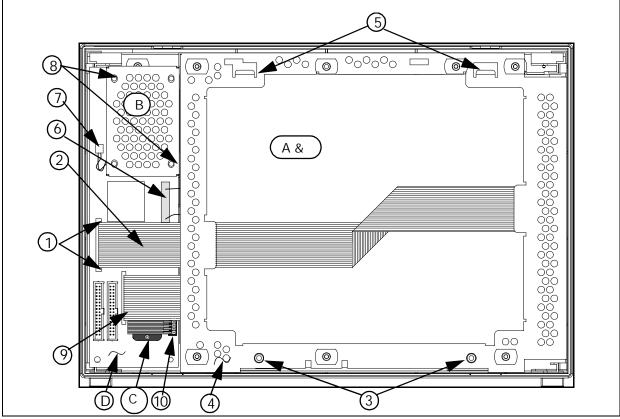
Front Panel Subassembly Layout - 9.5" LCD Display
